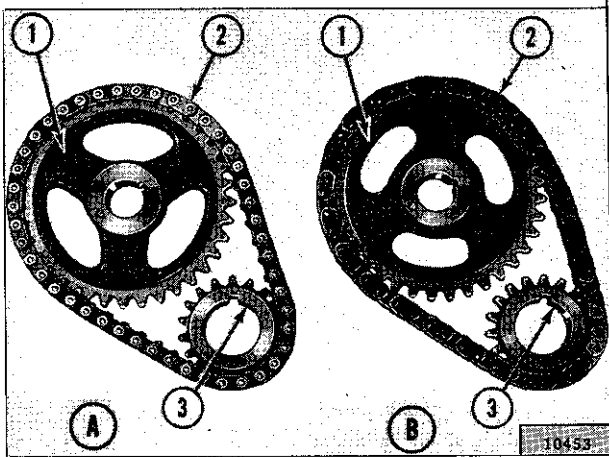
TWO TYPES OF TIMING CHAINS AND GEARS
